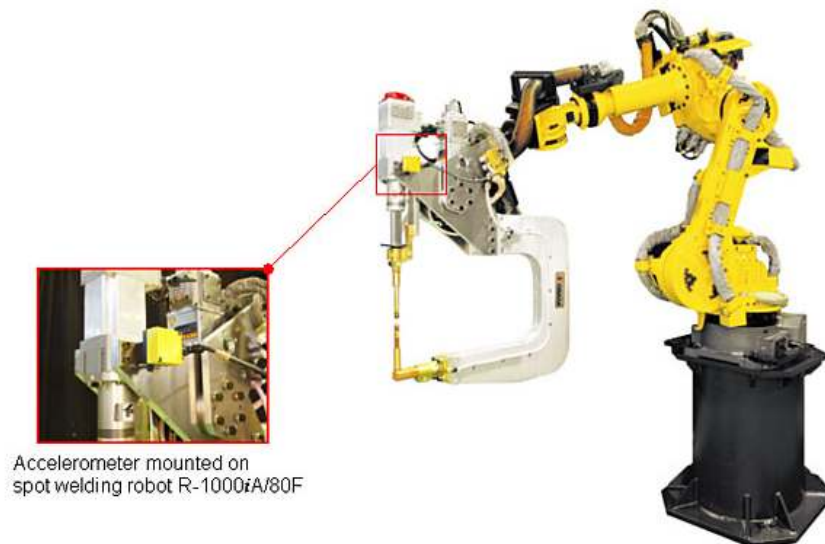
Industrial robot with large spot welding gun.
